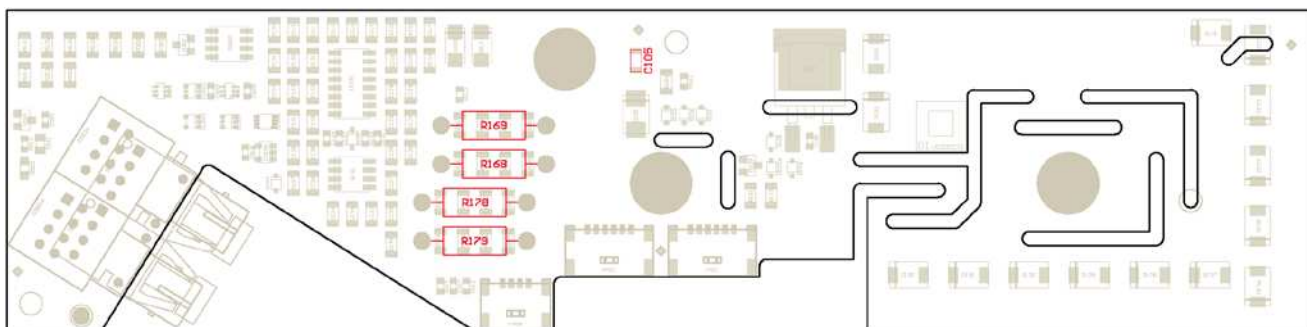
Assembly drawing of 1SP0335x2Mx with highlighted gate resistors
